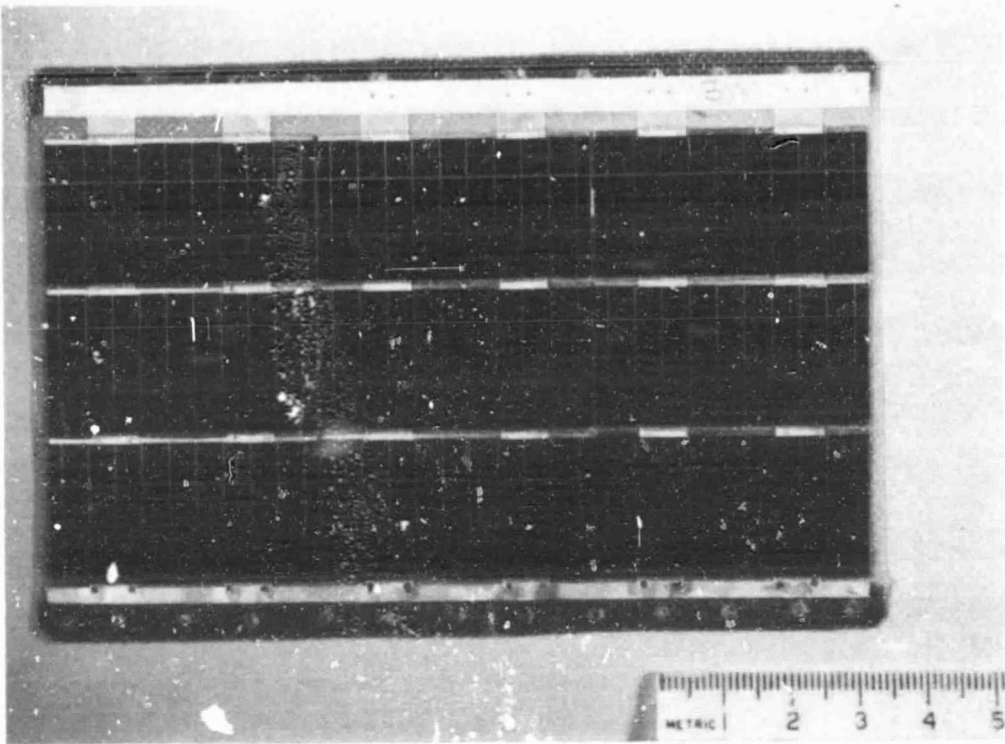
PARALLEL GAP WELDED MODULE FRONT
